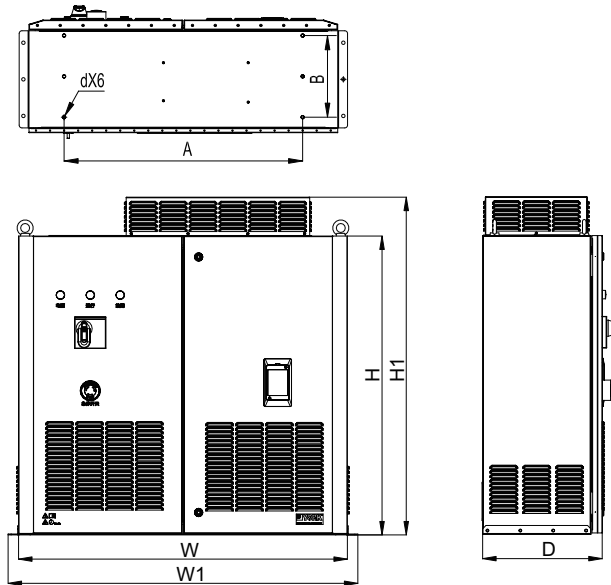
Appearance and dimensions of the CA300C AC drive cabinet (200–355 kW)
